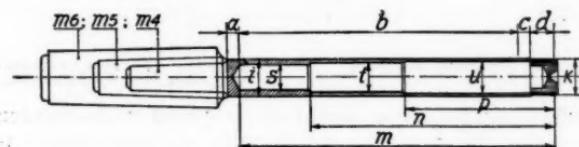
Taper shanked cylindrical mandrel—(a) near spindle nose (b) in 12 in. distance.
